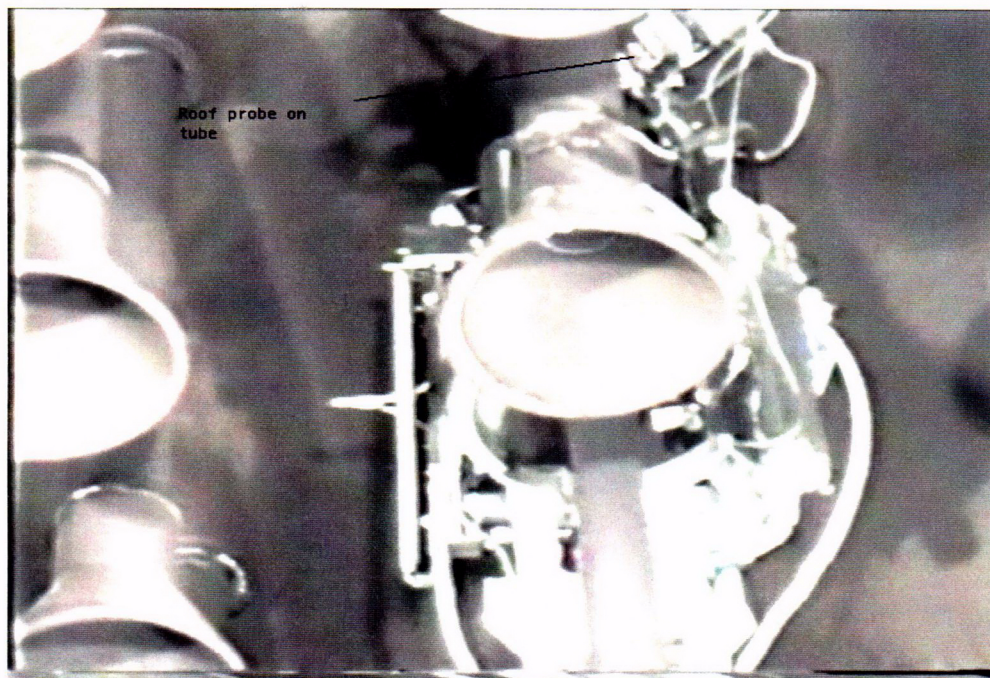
H.B. Robinson Penetration No. 63 Gap-Scanner Examination Tube End Visible on the Bottom [ ]<sup>a,c,e</sup>
